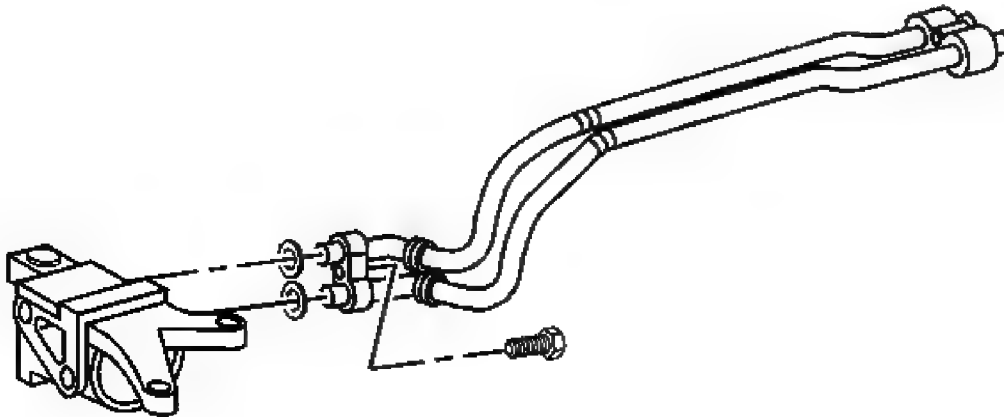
View Of Remote Oil Filter Inlet & Outlet Hoses To Remote Oil Filter Adapter
